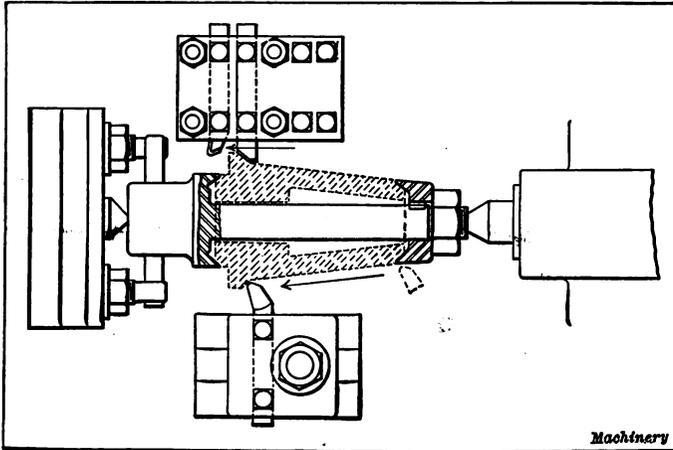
Finishing Tool Arrangement for Bushings shown in Fig. 7
